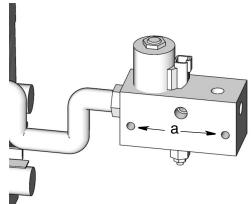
Mounting Dimension a = 3.25 inches (8.255 cm).
